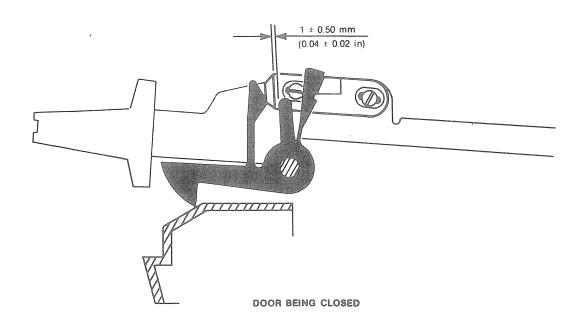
INTERLOCKING LATCH AND ACTUATOR
